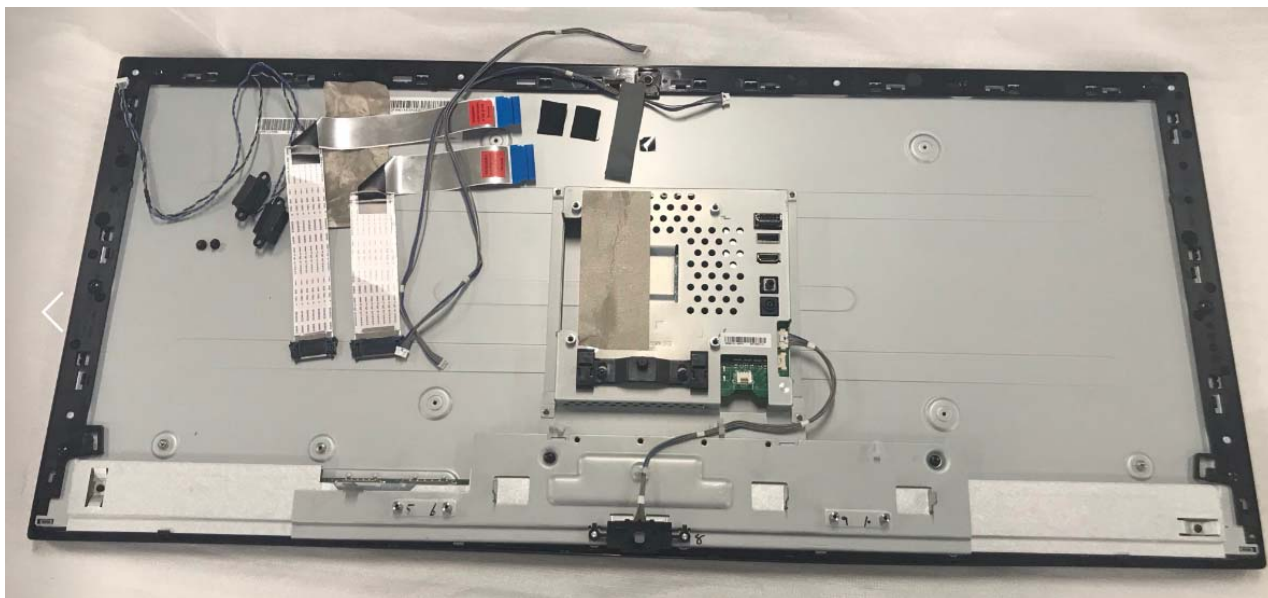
Disassemble the FFC cable (2EA), cable(2EA).
